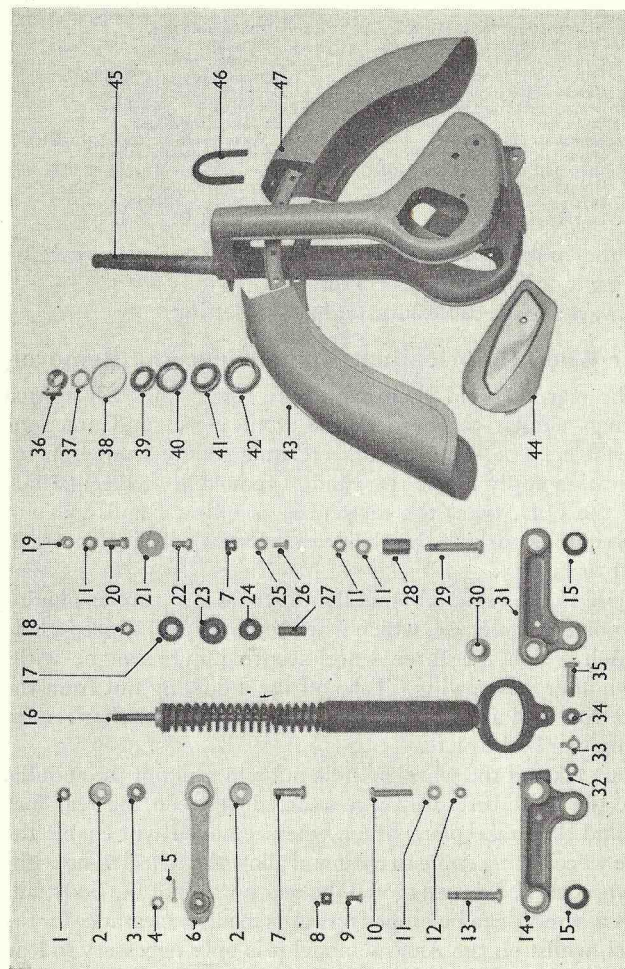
FRONT FORK AND MUDGUARD ASSEMBLY—LEADER AND ARROW MODELS.
